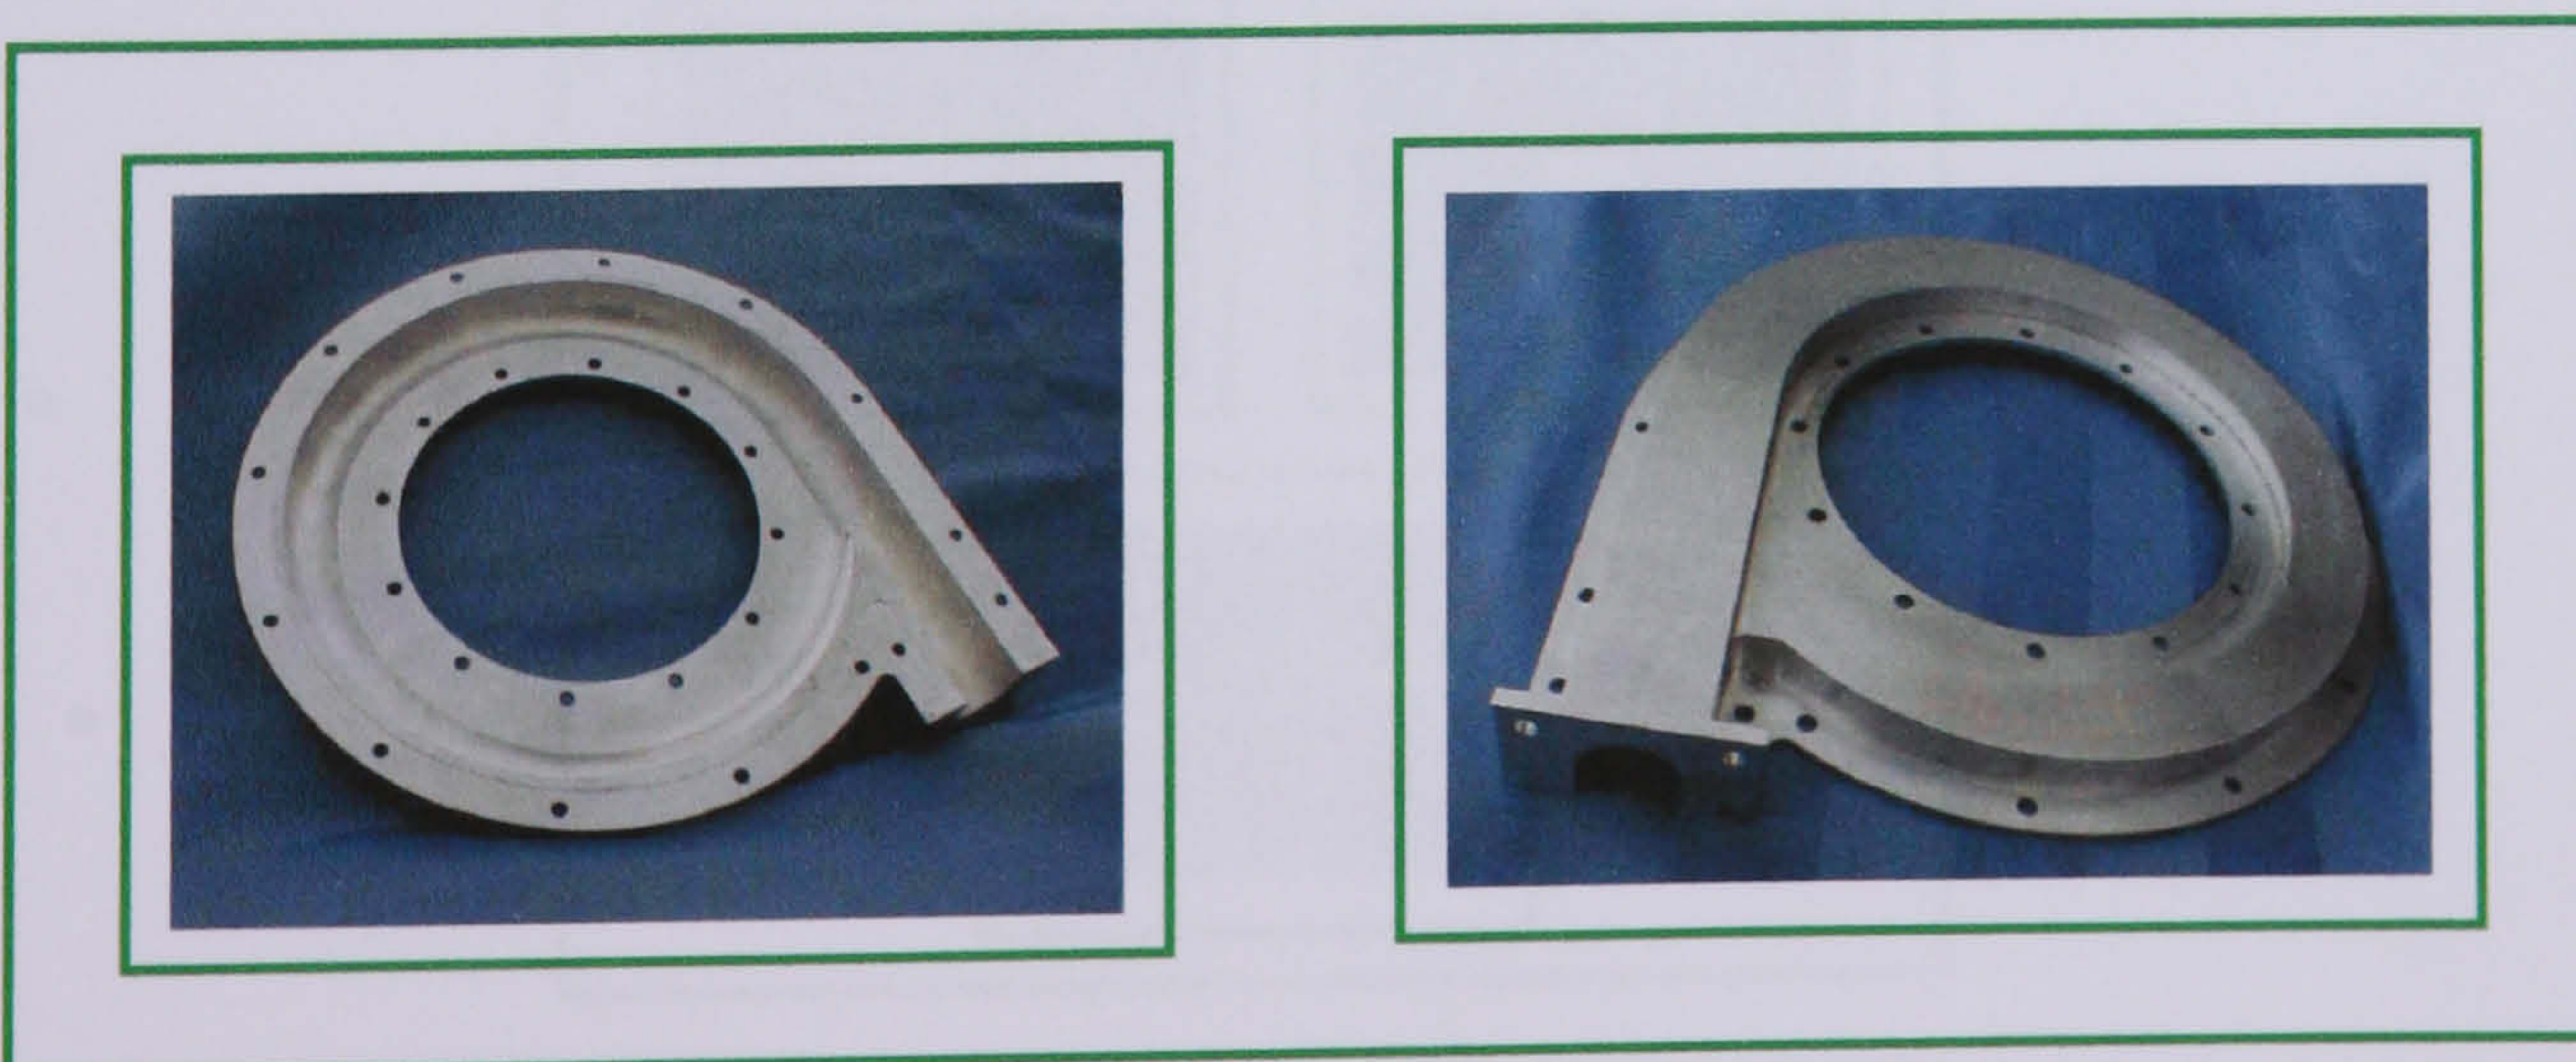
COMPRESSOR VOLUTE MACHINED FROM ALUMINUM ALLOY-7075
